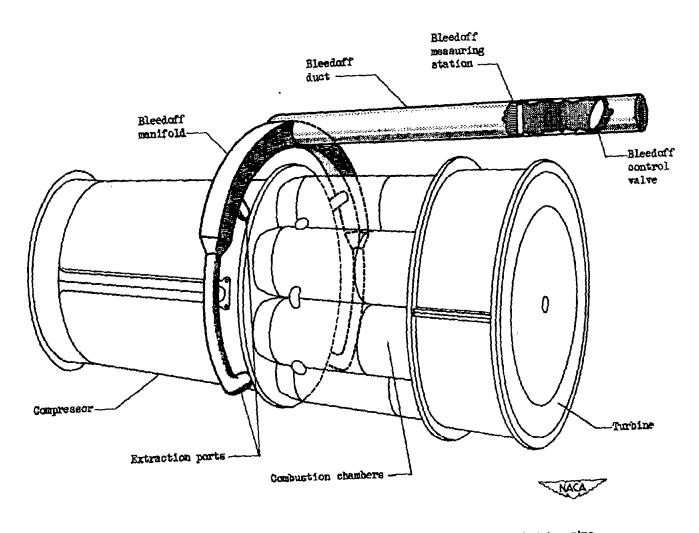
Compressor-outlet bleedoff system installed on axial-flow turbojet engine.
